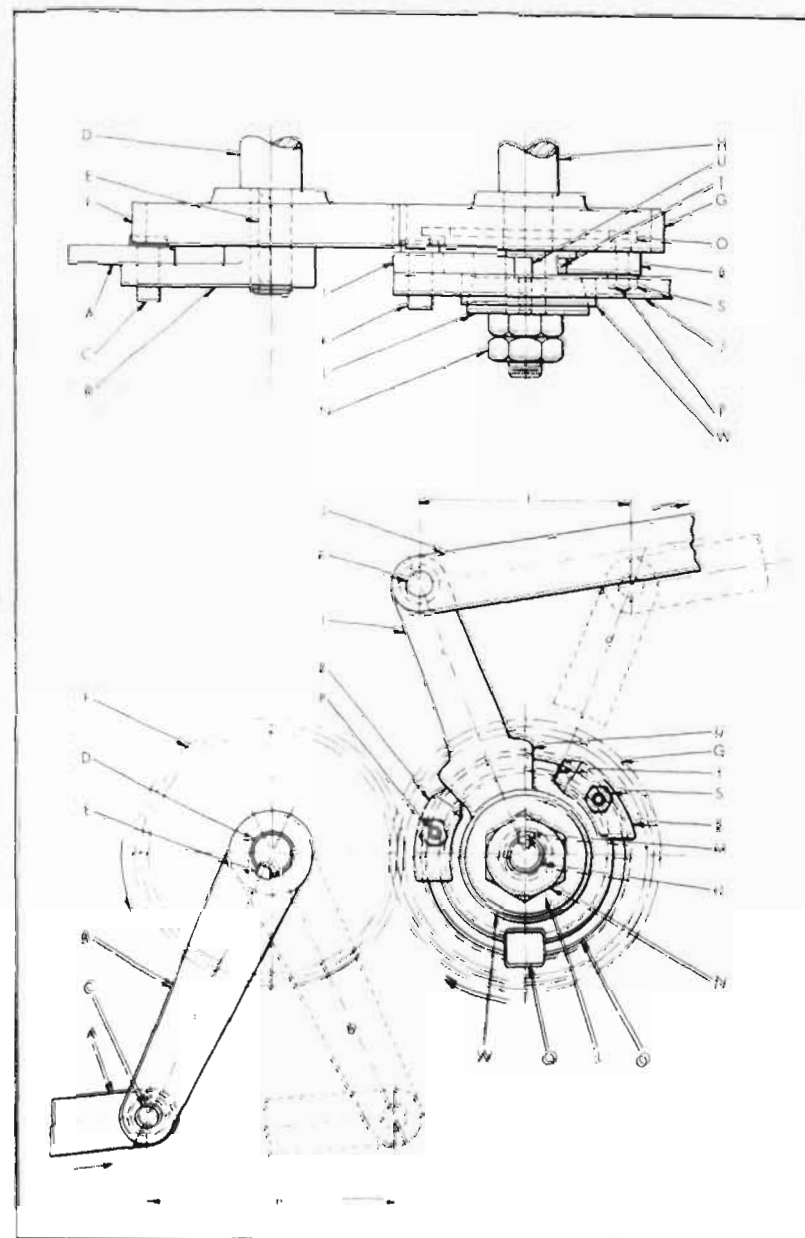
Gear and clutch mechanism which produces a reciprocating motion with dwell periods. The driving and driven members are connecting-rods *A* and *J*, respectively.
